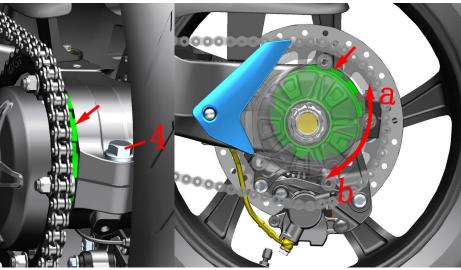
REAR WHELL		Adjustment chain	СНК	Q
